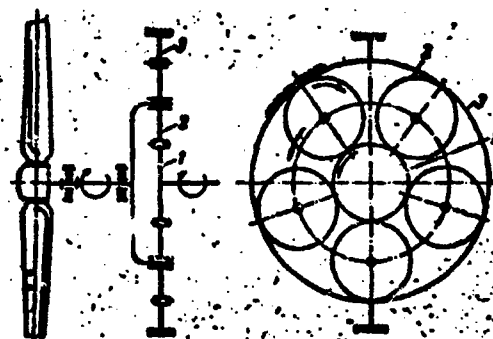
Diagram of a planetary reducer for a single screw drive: 1, Driving gear; 2, Satellite gear; 3, Stationary gear
